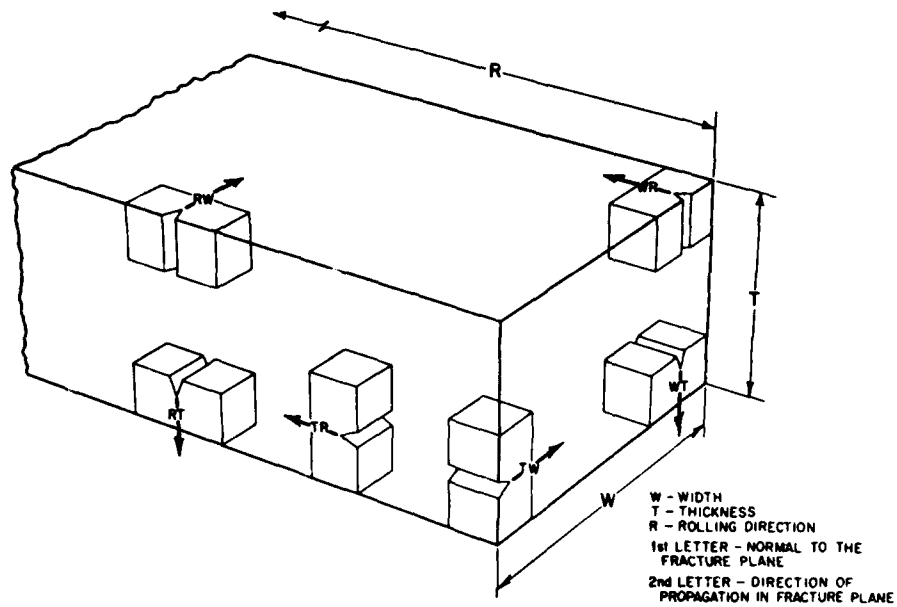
ASTM identification procedure for fractures in rolled plate (3)
